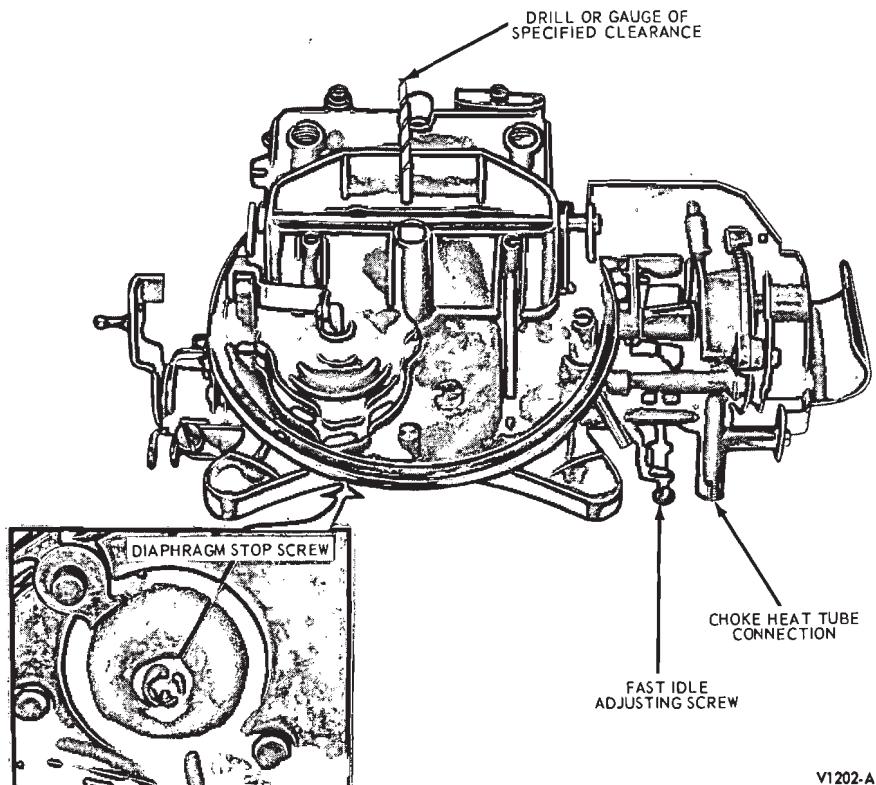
Choke Plate Pulldown Clearance —Autolite Model 2100-D 2-V Carburetor
